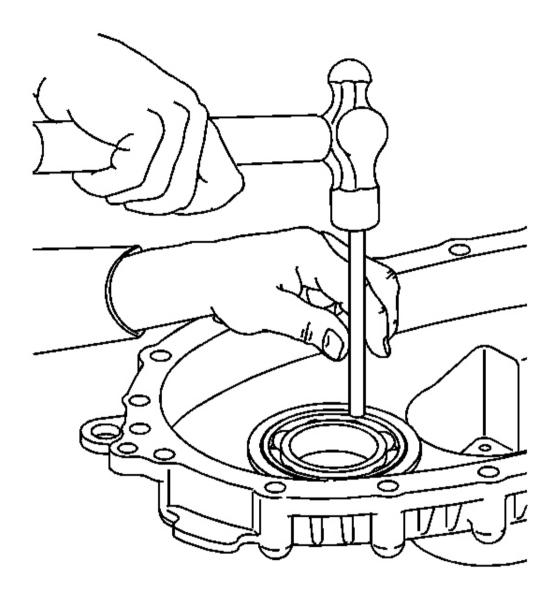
Installing Front Bearing Courtesy of GENERAL MOTORS CORP.
